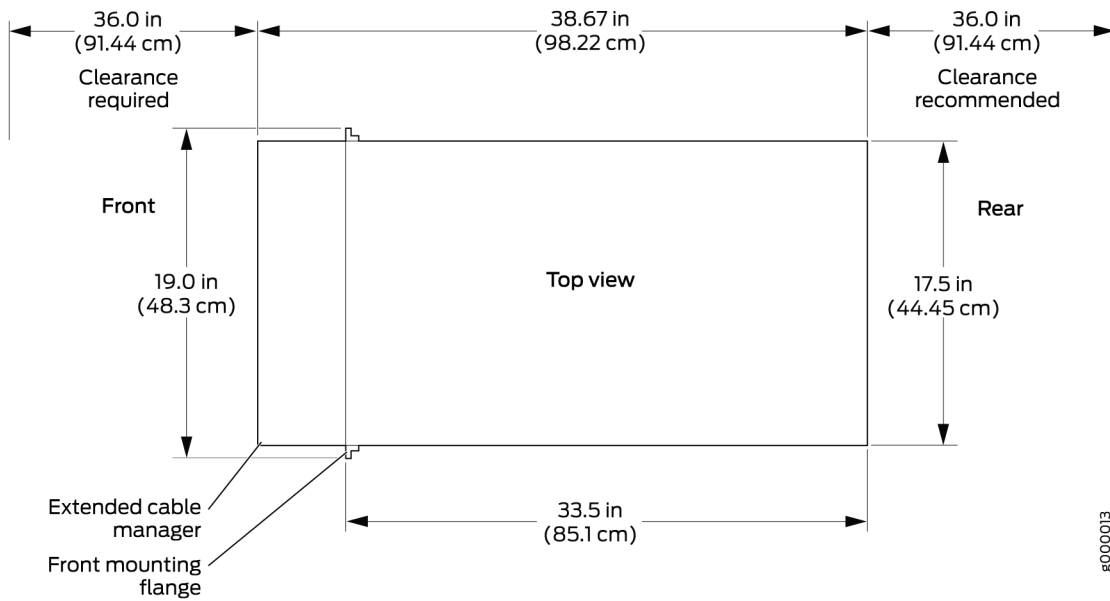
Chassis Dimensions and Clearance Requirements for the MX2020 Router with the Extended Cable Manager
